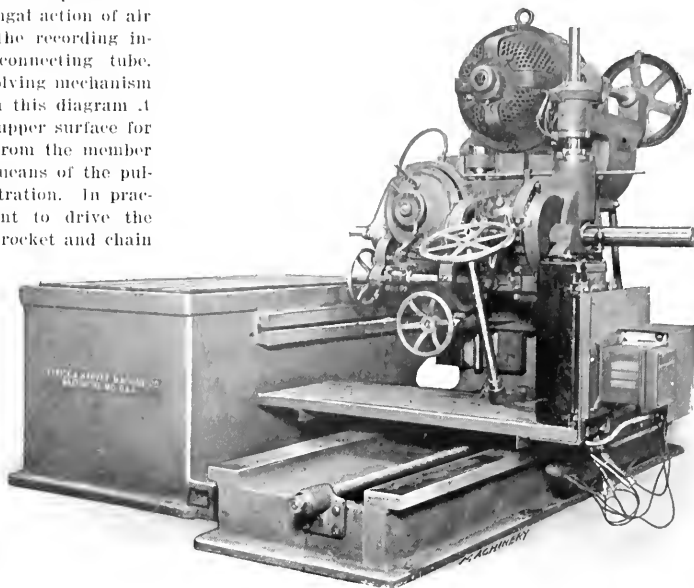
Operating Side of the Detrick & Harvey Horizontal Drilling Machine
